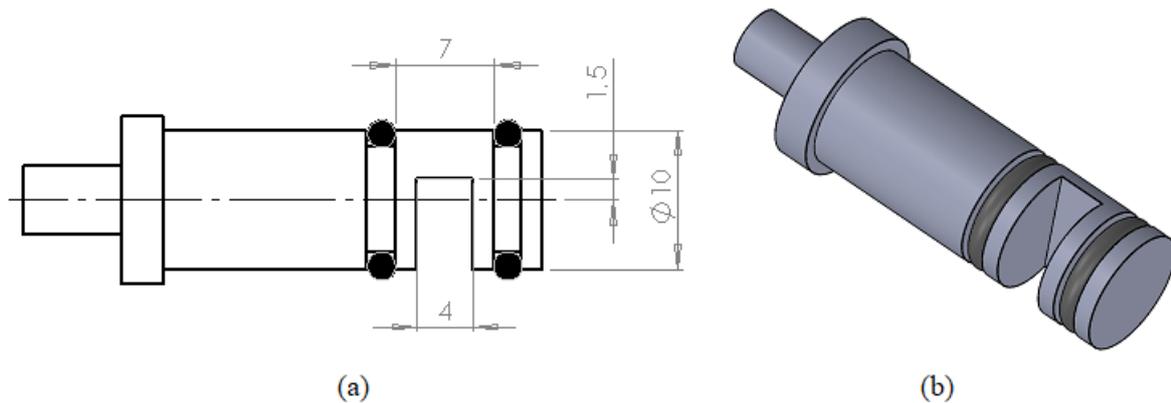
Valve Shaft a) front view with some dimensions b) perspective of 3D model
